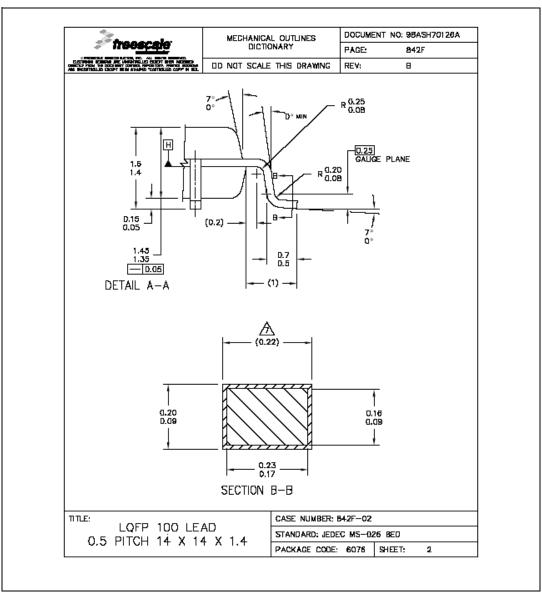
100 LQFP package mechanical drawing (Part 2 of 3)
